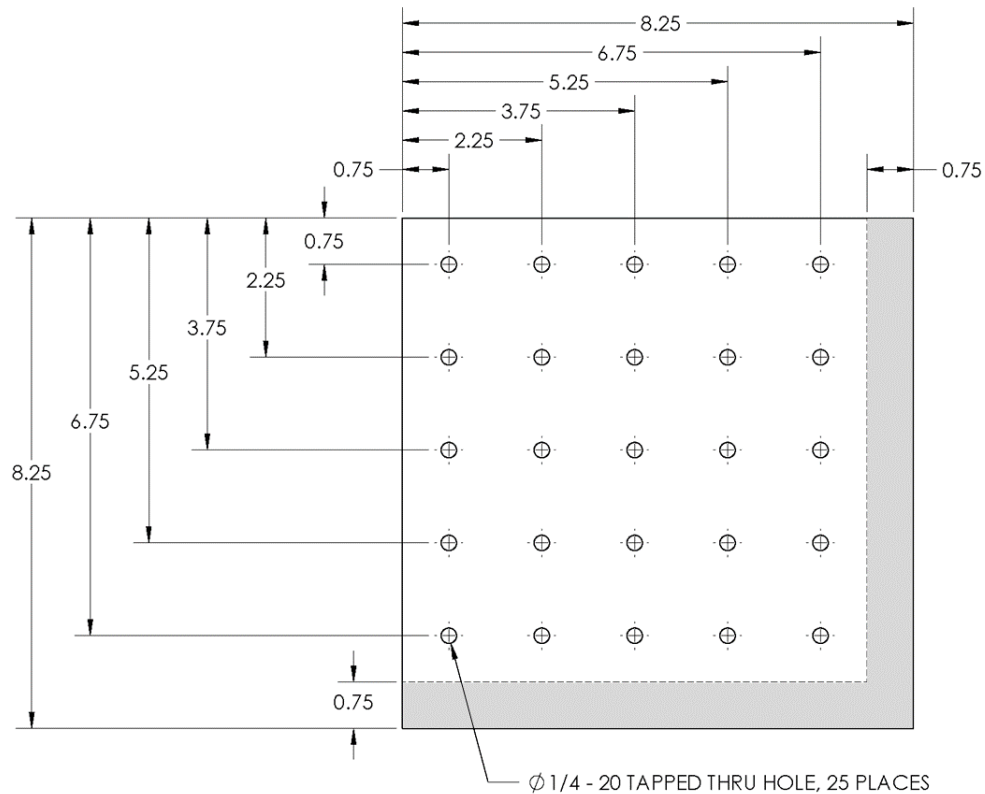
Dimensions (in inches) of crane mounting plate. Cranes may be mounted to the plate using any of the 1/4-20 threaded holes. The plate is 0.5" thick.
